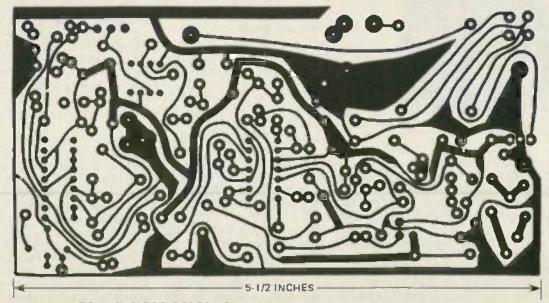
SINGLE SIDED PC BOARD contains sync corrector. RF modulator, and power supply.
